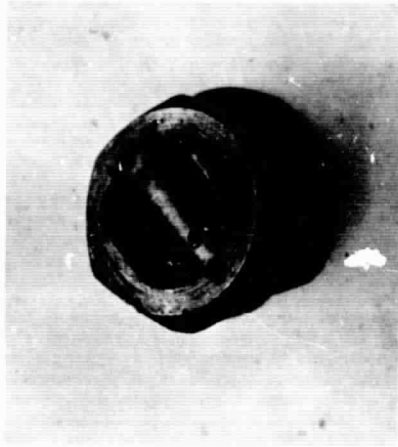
Photograph of the surface damage for the tool steel-tool steel combination run for 12 hours in air. Specimen shape .250 radius ball vs .375 radius socket. Mag 100x
